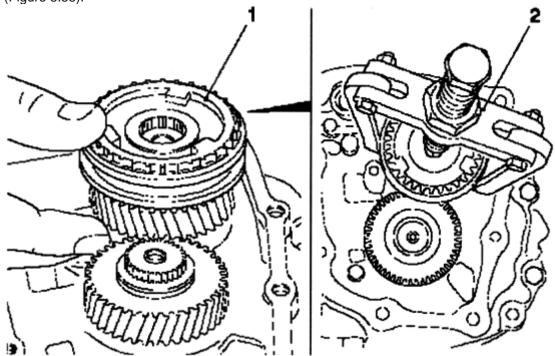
Withdrawal dentate wheels, gears fifth transfer and Corps sinhronizato-ra fifth transfer with Chief Shaft:
